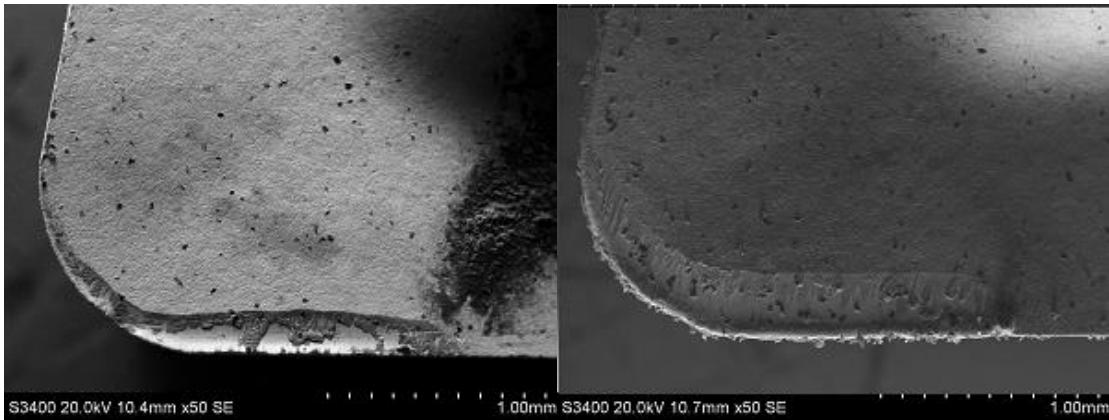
SEM image of cutting tool when cutting speed is 120 m/min and feed rate is 0.05 mm/rev (left) and 0.15 mm/rev (right) after machining 30 cm<sup>3</sup>
